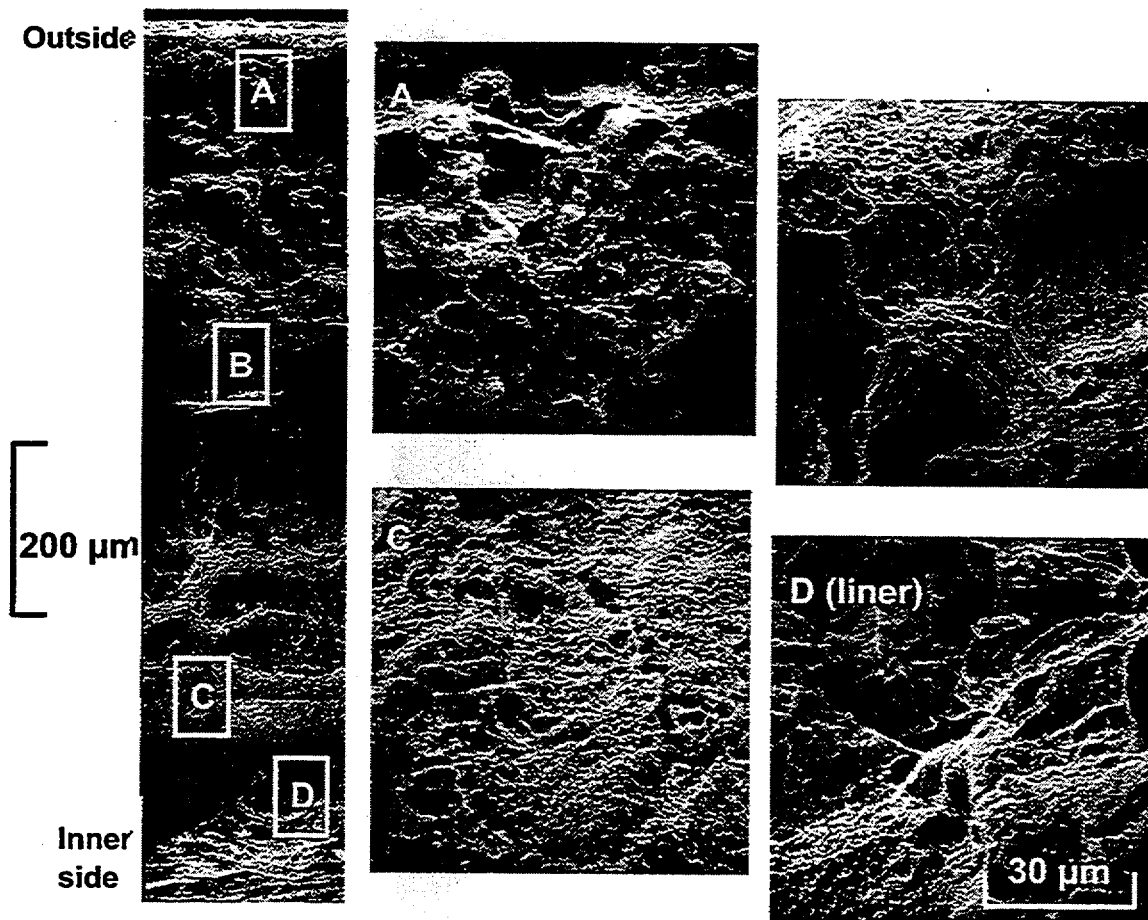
Fracture surface of failed cladding of FK-6.
